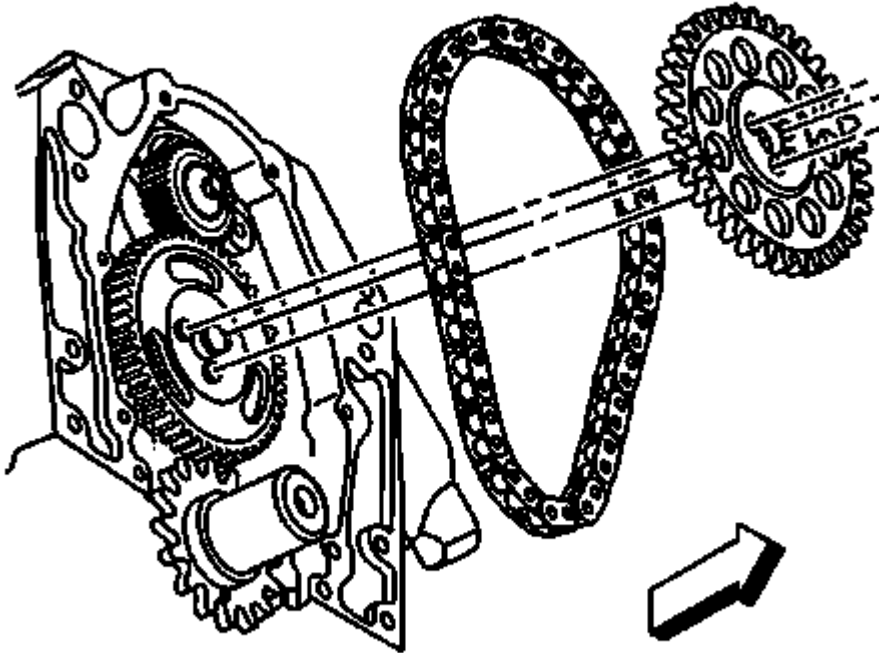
View Of Camshaft Sprocket & Camshaft Timing Chain
